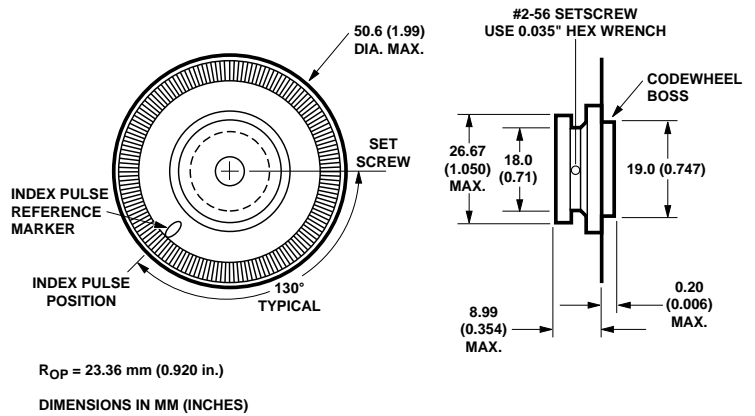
HEDS-6140 Codewheel Used with HEDS-9040.
